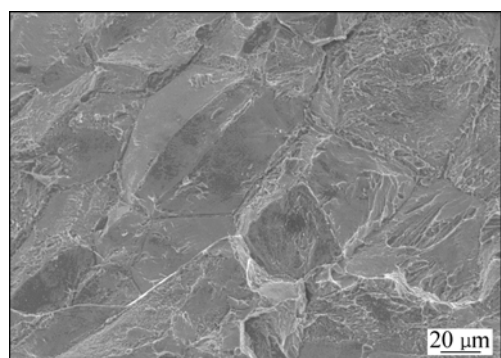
Fractograph of as-welded joints after tensile tests at 650 °C
